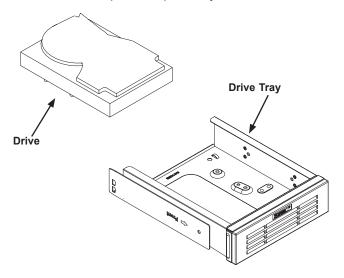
Installing a 3.5" Drive to the Drive Tray
